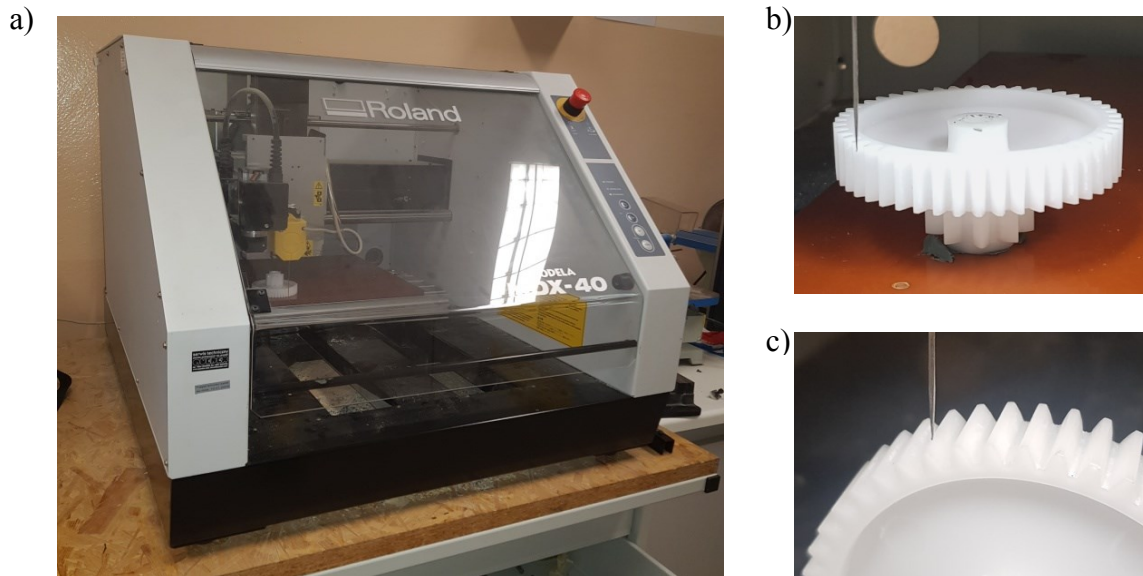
Digitization of the model using the contact method: a) Roland MDX-40 measuring machine, b) gear geometry measurement, c) tooth profile scanning.
